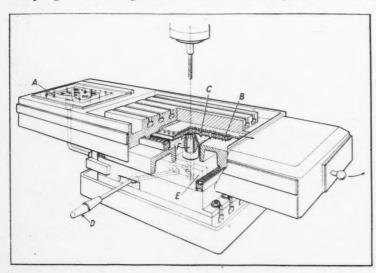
Perspective sectional view of the Aciera type TR33 co-ordinate positioning table for use on a vertical drilling machine
